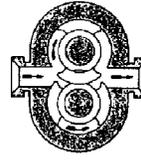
CIRCUMFERENTIAL PISTON PUMP
